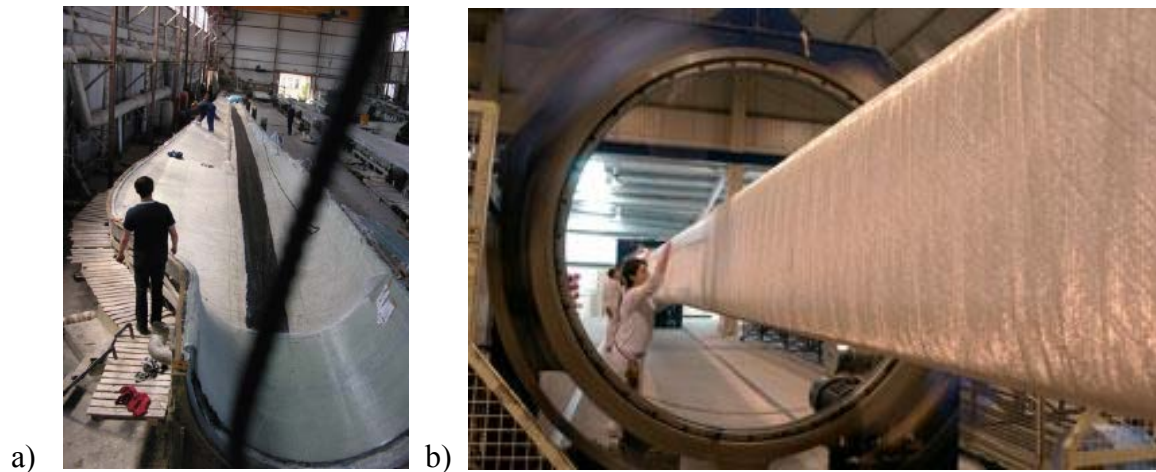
a) Carbon fibre laying up for manufacturing of spar (photograph is courtesy of Gary Kanaby, Wind Energy Services), b) carbon and glass fibre tape winding of spar for a Gamesa wind turbine blade (photograph is courtesy of Gamesa).
